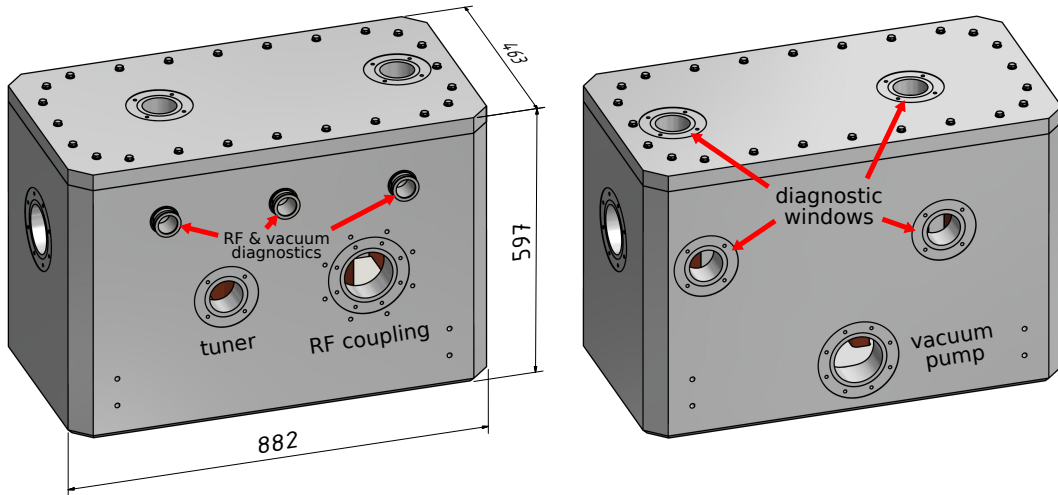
Prototype tank dimensions (in mm) and flange configuration.
